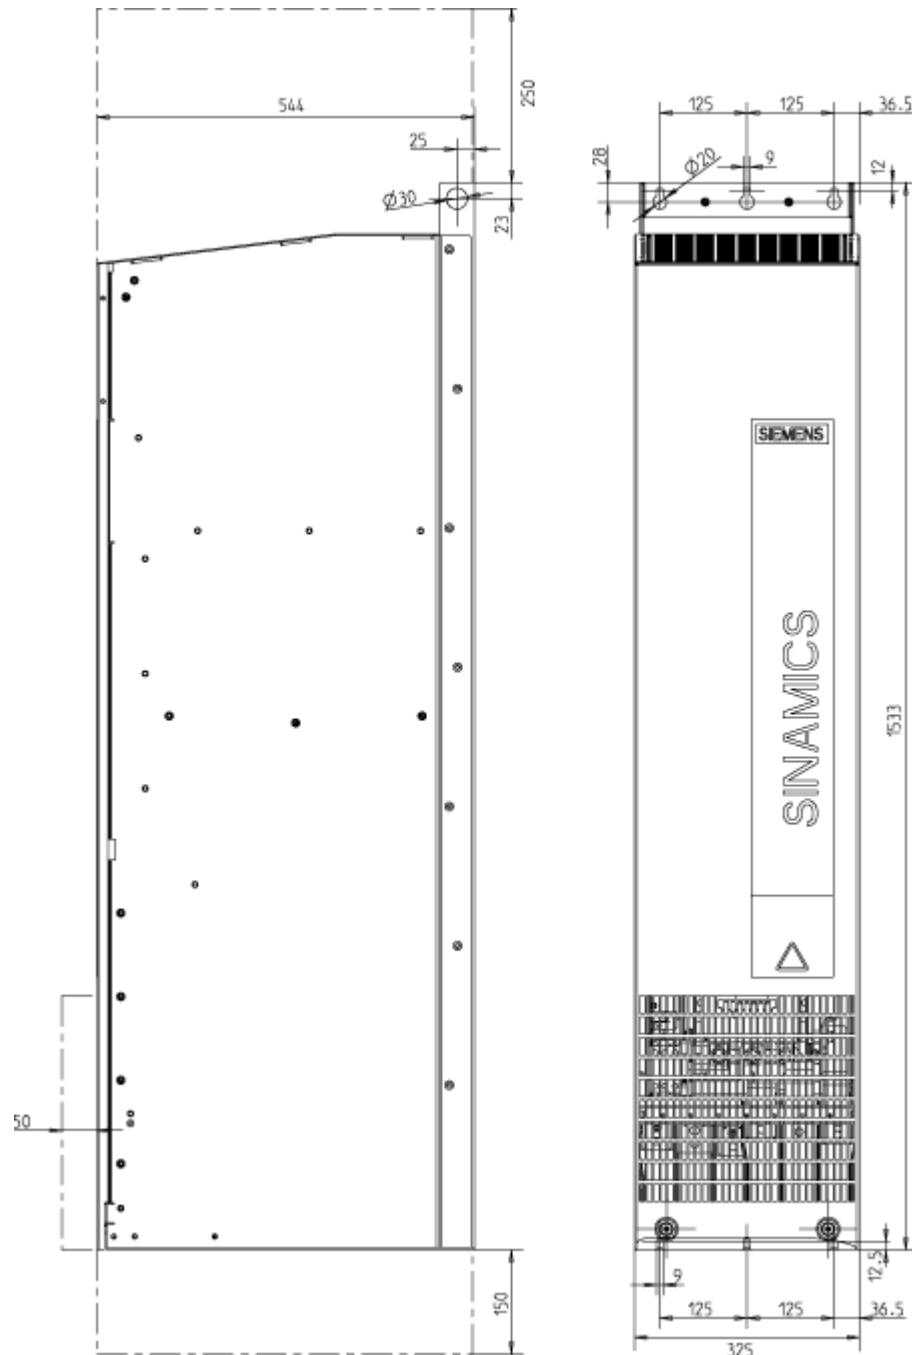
Dimension drawing for Active Interface Module, frame size GI Side view, front view
